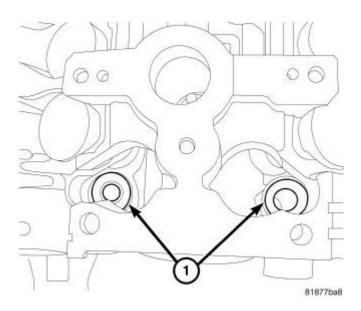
Washers Must Be Installed With Bevel Edge Up Towards Bolt Head Courtesy of CHRYSLER GROUP, LLC
